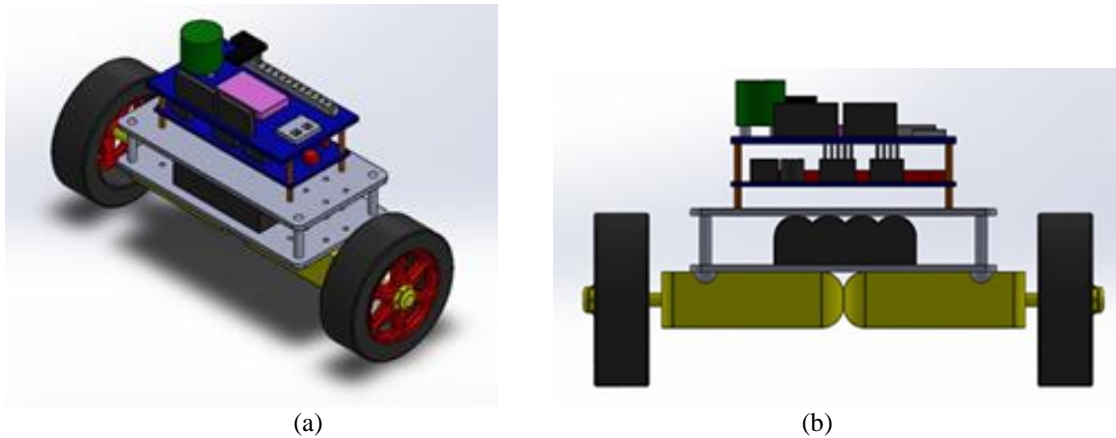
The model of a two-wheeled self-balancing robot in SOLIDWORK. (a) 3-D view, (b) Front view
